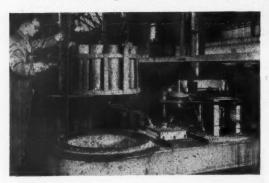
Loaded fixture is lowered into work chamber of Super Cyclone.
